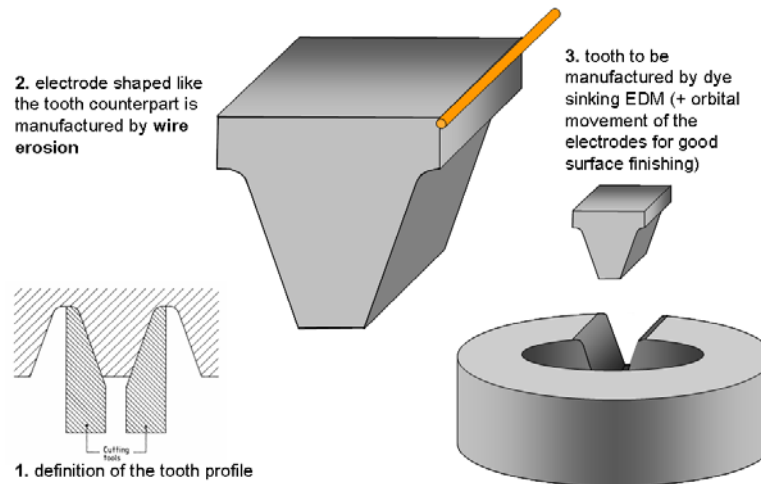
MANUFACTURING STEPS FOR THE PROTOTYPING OF THE BEVEL GEARS
